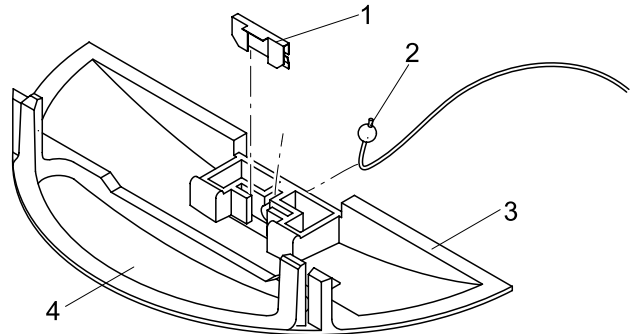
Outside emergency actuation handle, dismantling and assembling
